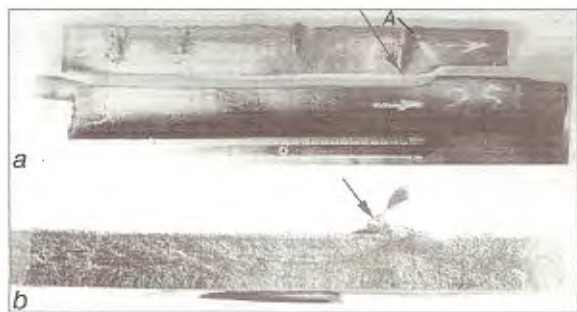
Fragment of a tank fracture: *a* — fracture site (A — side fillet weld); *b* — fracture site (shown by an arrow)
